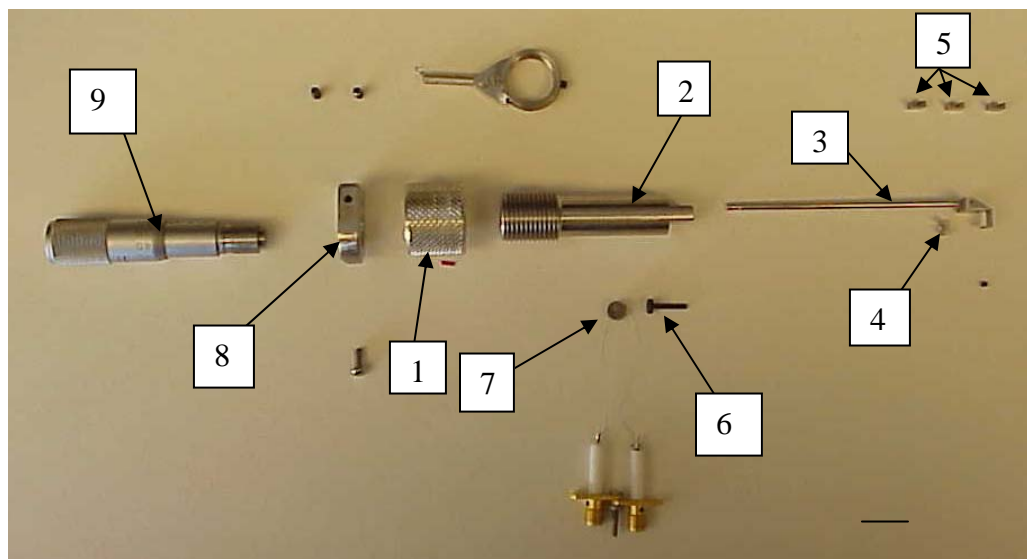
Disassembled arterial tonometer for short-term testing. 1) rear cup 2) main body 3) rod with a hook like support 4) spring 5) U-shape inserts 6) pin 7) piezoelectric transducer 8) micrometer adjusting the applanation level 9) vessel
